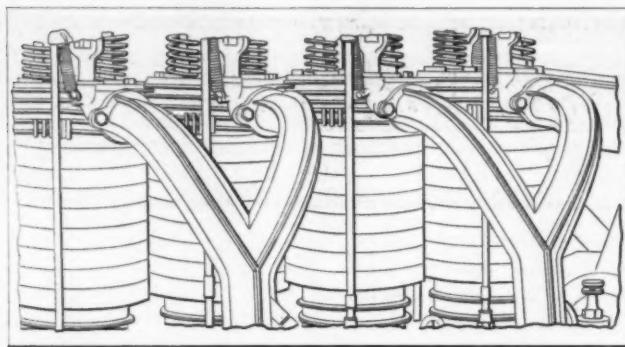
Y-shaped exhaust manifold used on an air-cooled motor, employing two units and requiring abrupt ends at the pipe
